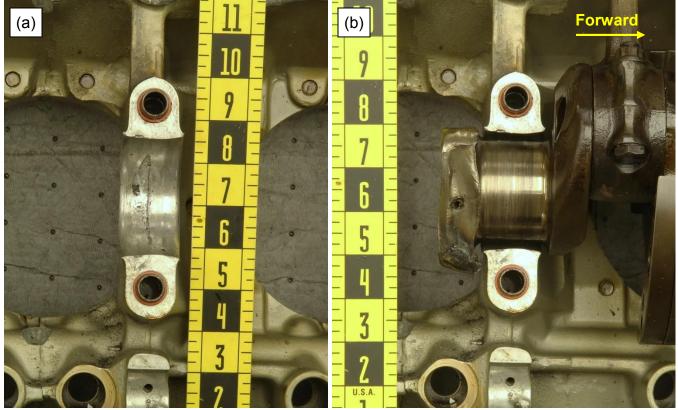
The second main bearing journal of the left case (a) without the crankcase and (b) with the crankcase in position.
